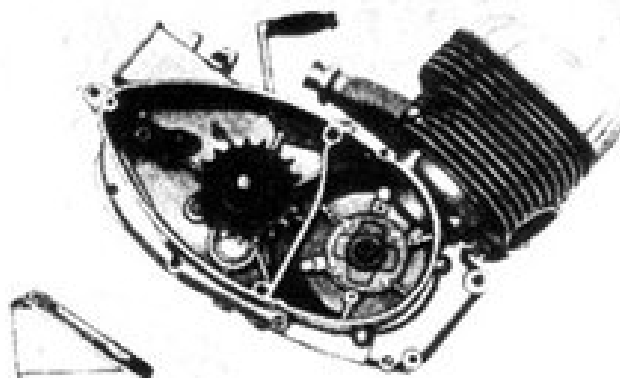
HЖ-10-3 engine with manifold, removed for unscrewing the fastening screw of crankcase halves.
